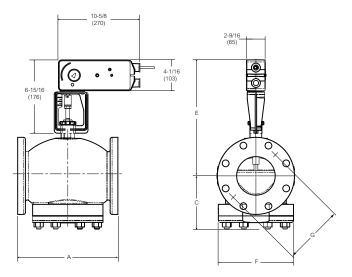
Mx61-720x with 2-1/2" to 5" Flanged 2-Way Globe Valves
